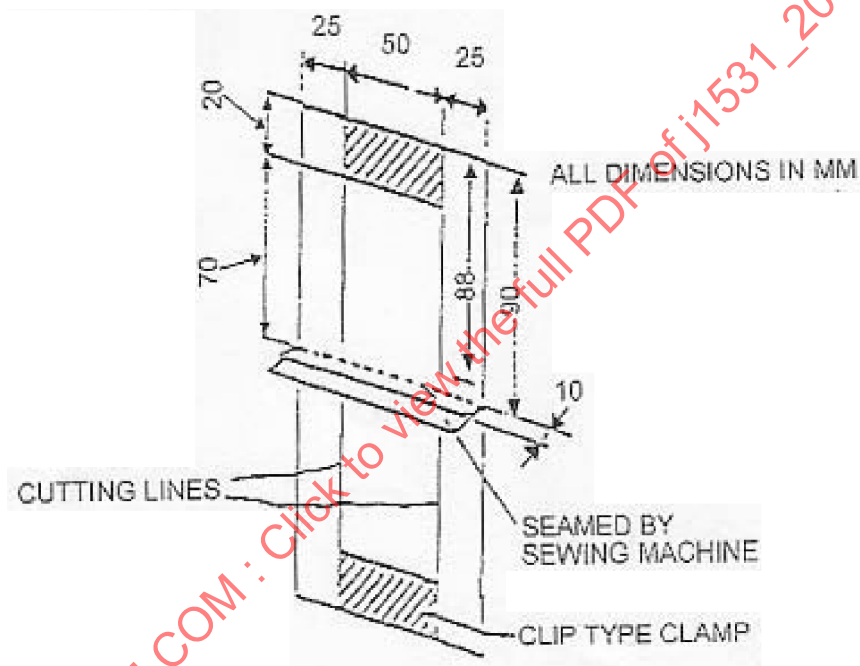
SEWN TEST SPECIMEN WITH DIMENSIONS
